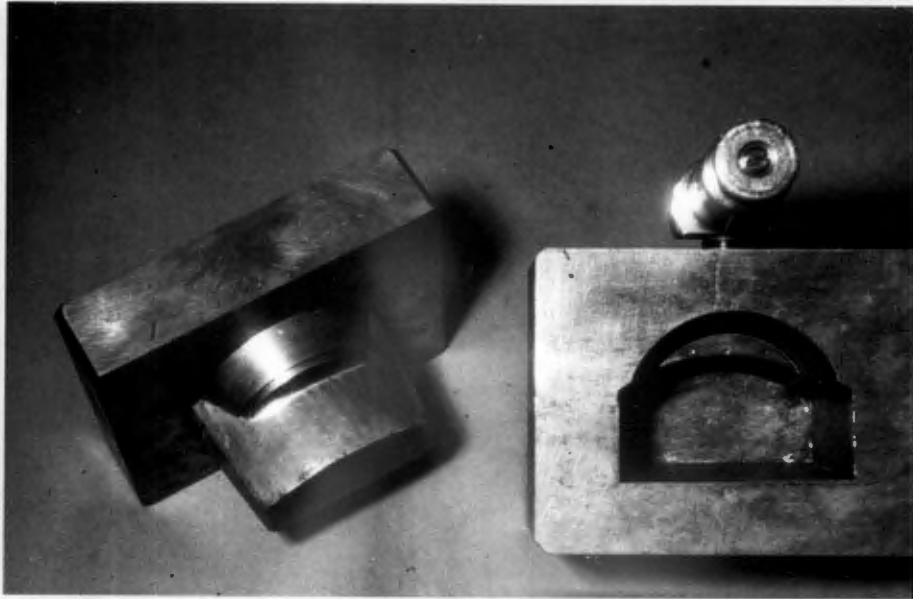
Metal mould used for the manufacture of Silastic Valve 1.
